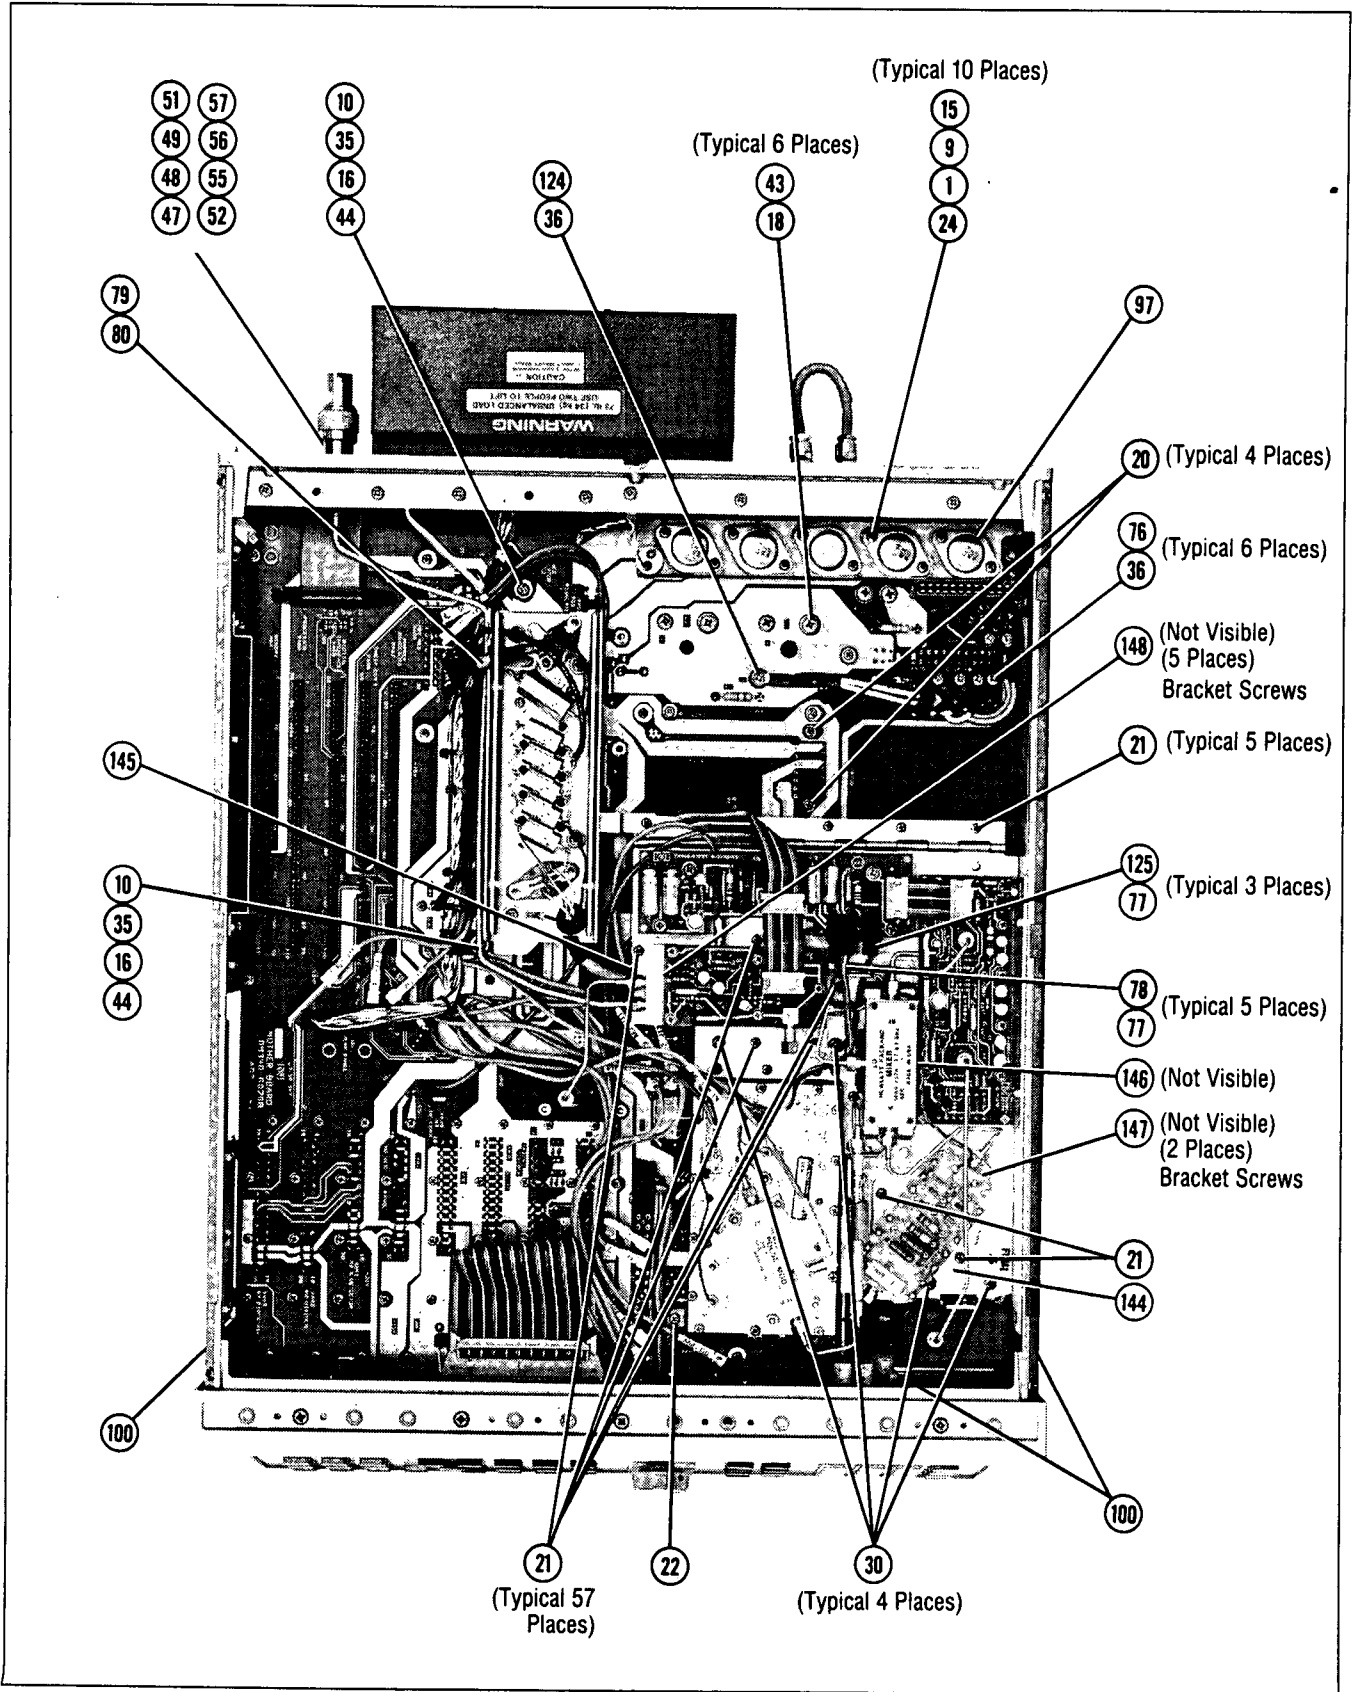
Miscellaneous Mechanical & Chassis Parts (3 of 6)
